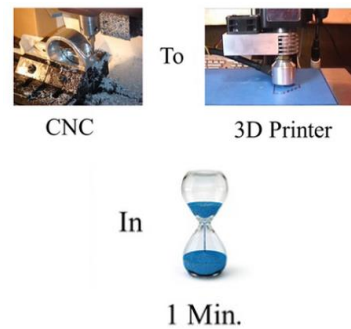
Steps for assembly on the CNC- FASTAX head [9]
